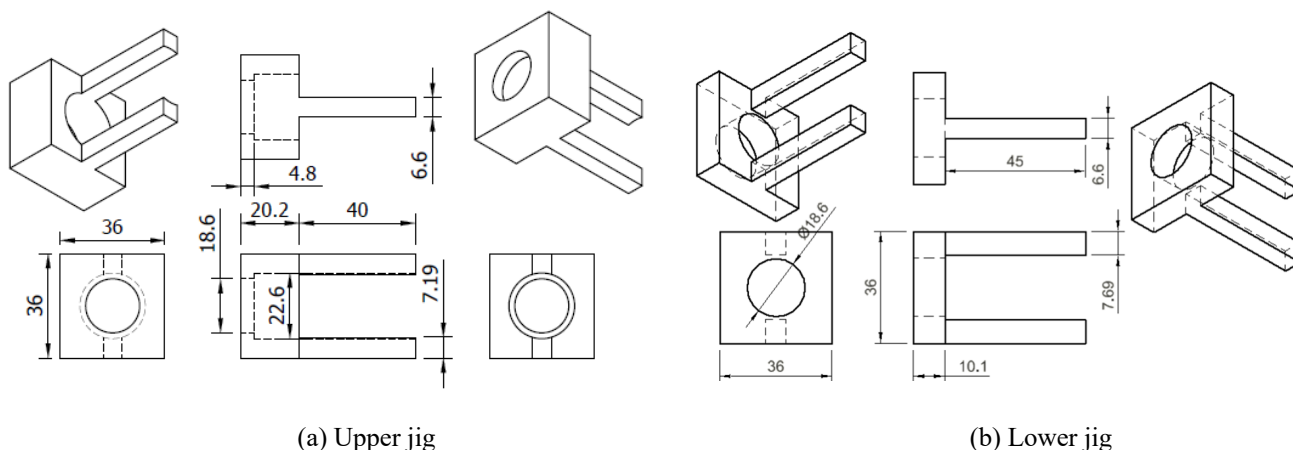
Upper and lower jigs for tensile tests of the novel snap-lock system.
